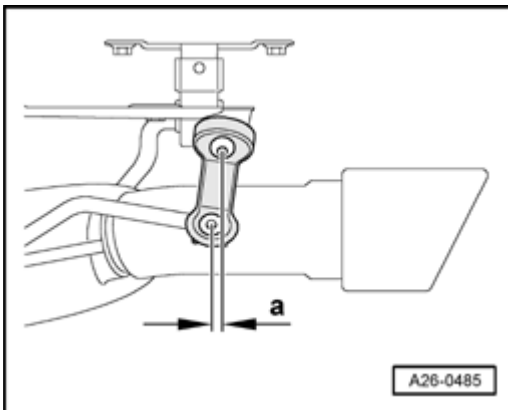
Pushing Rear Section Of Exhaust System Toward Front Of Vehicle
